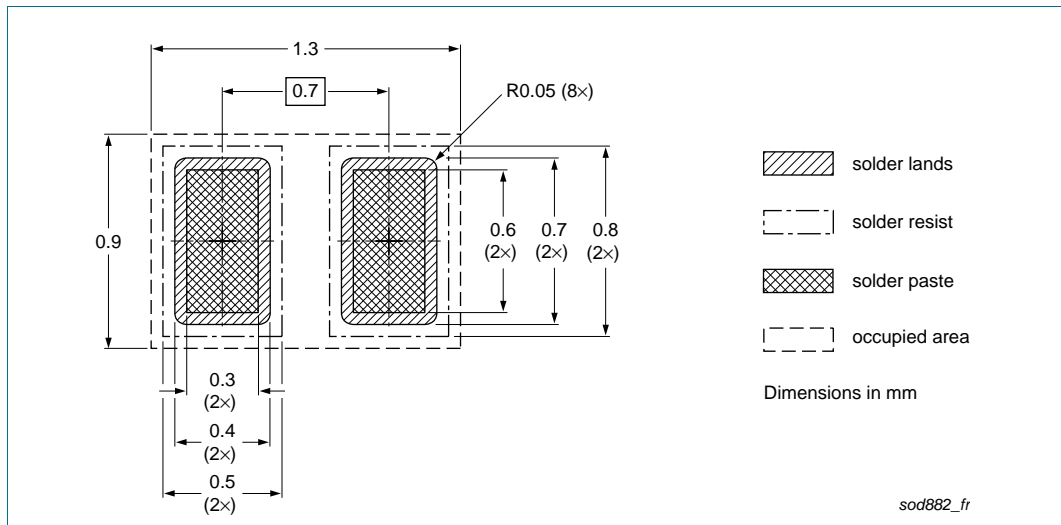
Reflow soldering footprint BAS16L (SOD882/DFN1006-2)
